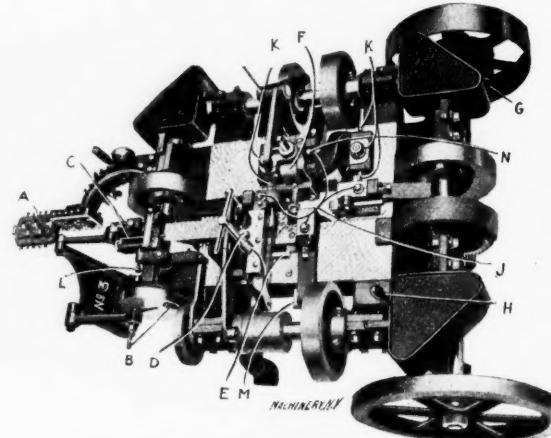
Top View of Machine, showing Mechanism and Adjustments.
